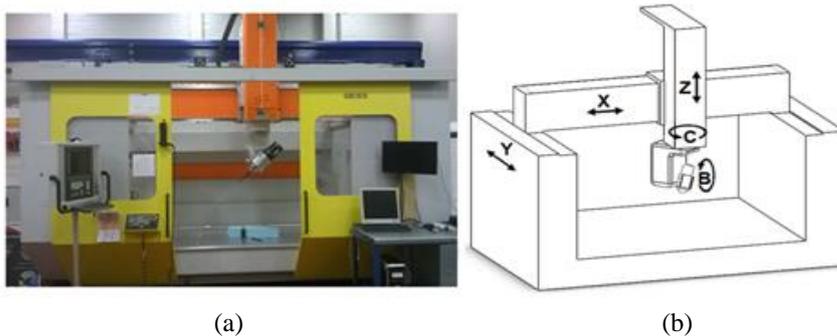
Five-axis CNC machine tool (a) picture (b) configuration.
